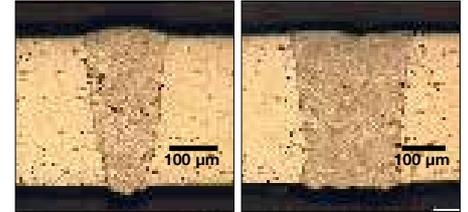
Welds in AlCuMg₂ aluminium alloy (t = 0.3 mm, P = 200 W, f = 50 mm) at two welding speeds (left) v = 30 m/min; (right) v = 15 m/min
